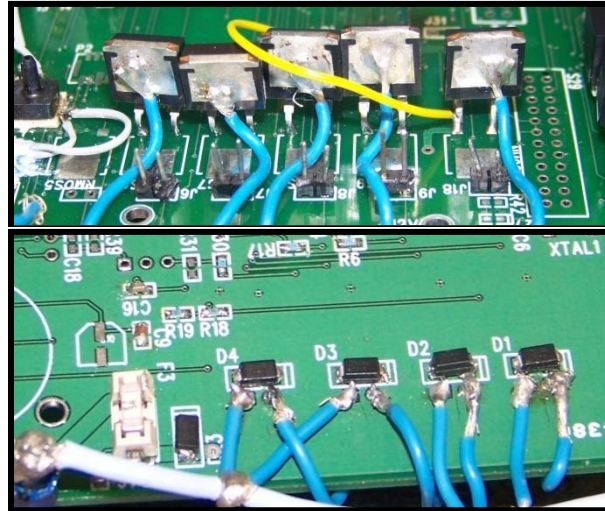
Newly replaced MOSFETs on Sub-Hub PCB with hardwired traces on the rear of the PCB.
